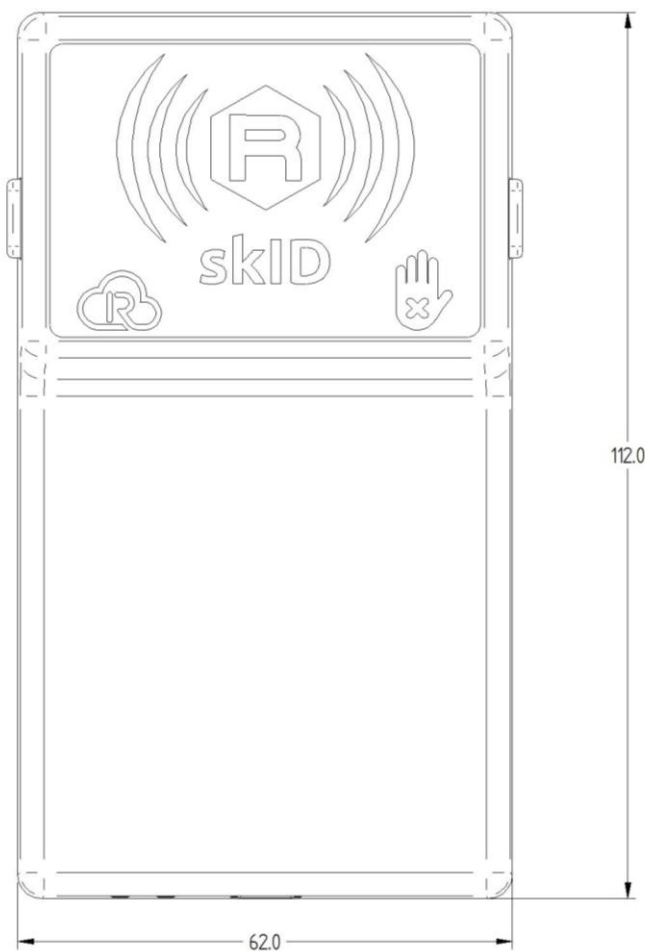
skID R1280I Technical Drawings – Front panel view
